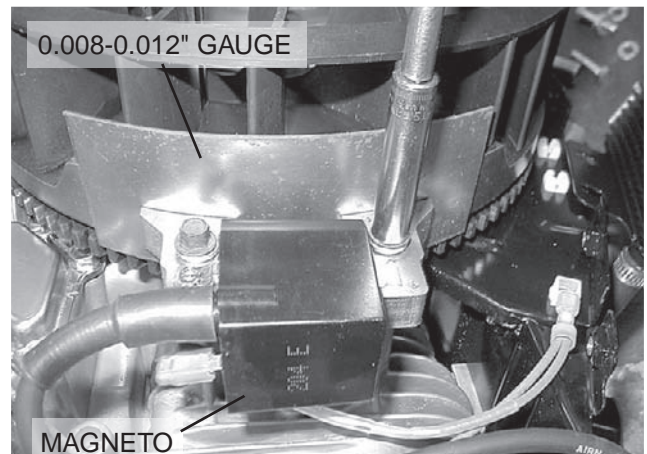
Setting Ignition Magneto (Armature) Air Gap
